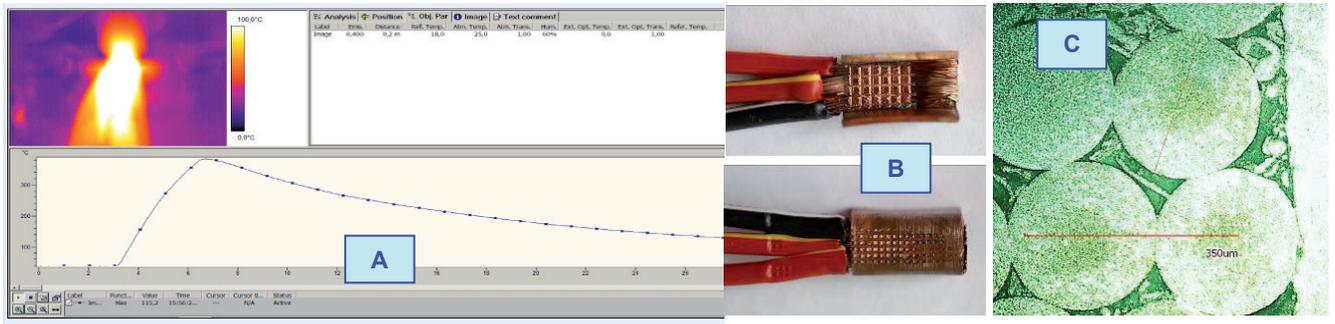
Thermography analysis and digital microscopy using HIROX 1300; A – thermography analysis; B – macro image; C – ultrasonic welded joint
